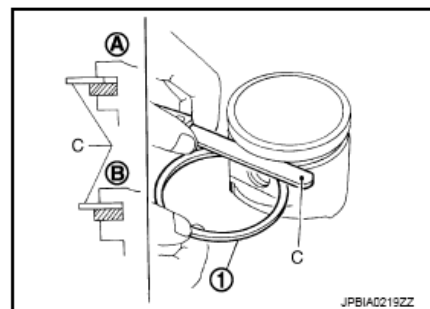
Measuring Side Clearance Of Piston Ring And Piston Ring Groove Using Feeler Gauge
